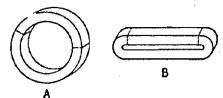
Location of Transverse Tension Test Specimens in Ring Cut from Tubular Products.
